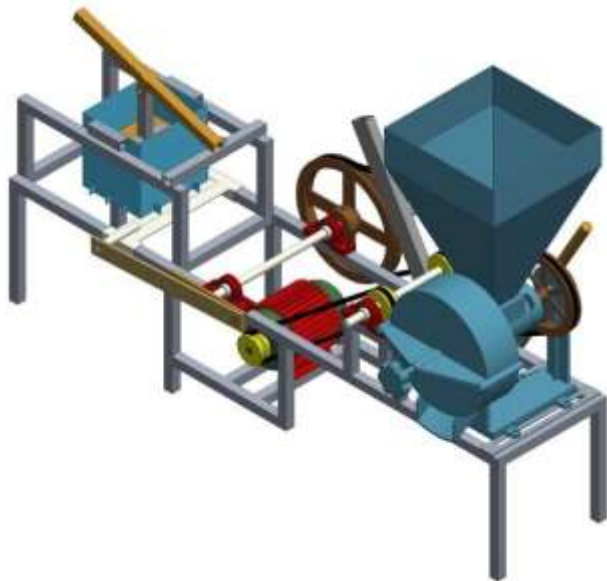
3-D Model of Puran Crusher and Vegetable Cutting Machine
